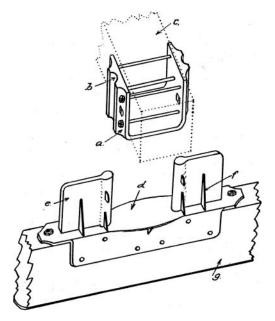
The McLaren Patent Sled Knee. a. Cross beam casting. b. Groove in cross beam casting. d. Runner casting. e. Knee blocks. f. Flanges which brace the knee blocks.
